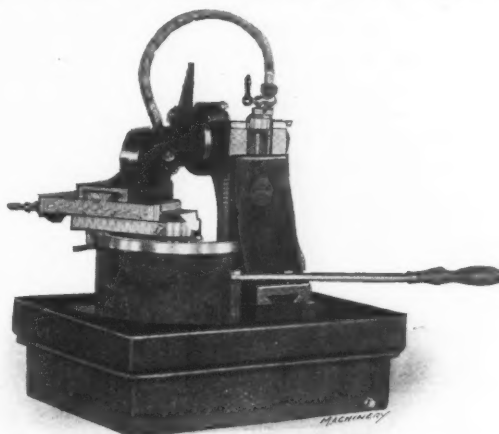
Waltham Cutter Grinder adjusted for grinding One Angle of a 60-degree Angular Cutter
